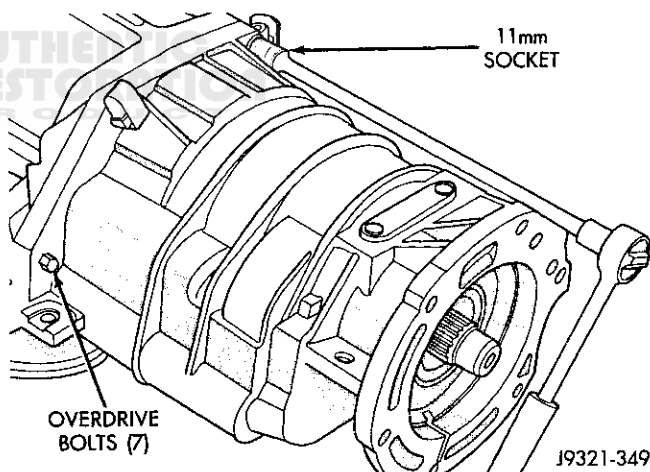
Removing/Installing Overdrive Unit Attaching Bolts
